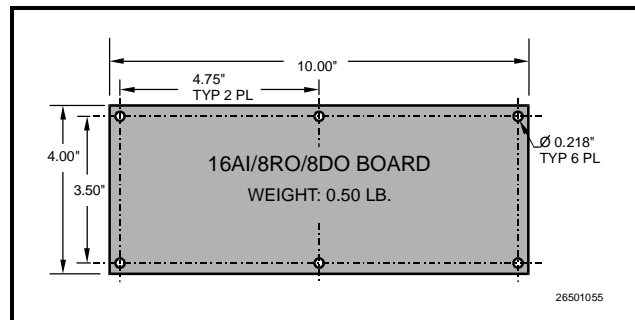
16AI/8RO/8DO Mounting Dimensions
